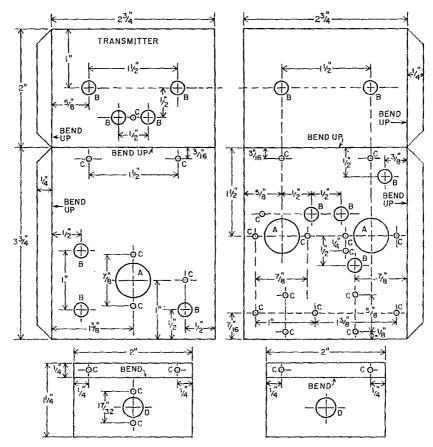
Detailed layout drawings for the transmitter and receiver chassis. Hole sizes are as follows: A—¾ inch, B—¼ inch, D—¾ inch, D—¾ inch, Bent-up edges may be omitted if stiff sheet metal is used.
